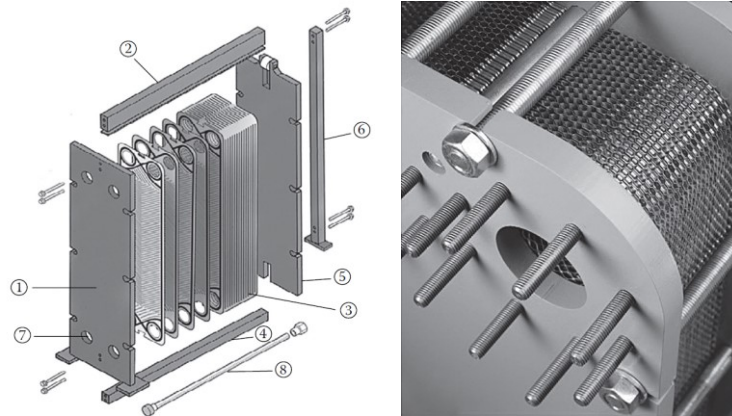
Plate heat exchanger. Left: Construction details—schematic (Parts details: 1, Fixed frame plate; 2, Top carrying bar; 3, Plate pack; 4, Bottom carrying bar; 5, Movable pressure plate; 6, Support column; 7, Fluids port; and 8, Tightening bolts.) and right: closer view of assembled plates.
